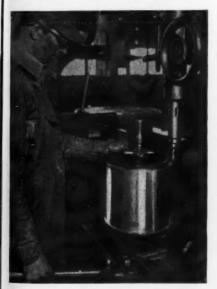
Floating rod bushings are drilled and countersunk in this fixture, which is swung to horizontal position when the piece is properly clamped.
